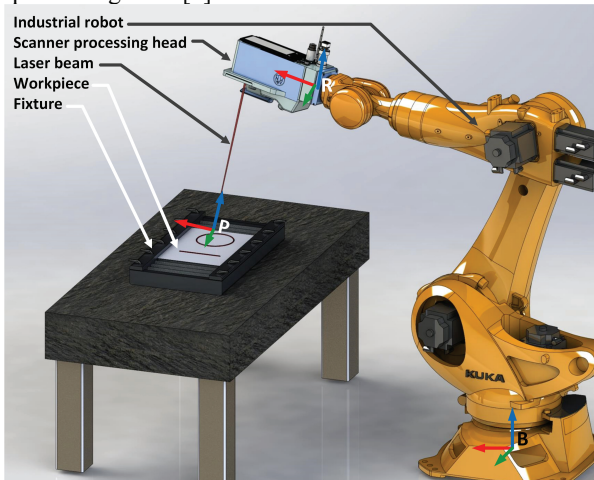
A KUKA Quantec KR 120 R2500 pro mounted with an Arges remote welding elephant head. Notice the position of the three frames, the base frame B, the robot frame R and the processing frame P.
